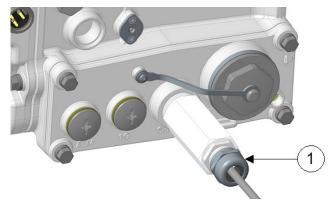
Exploded View of Connecting Fiber-Optic Cable to the Router
